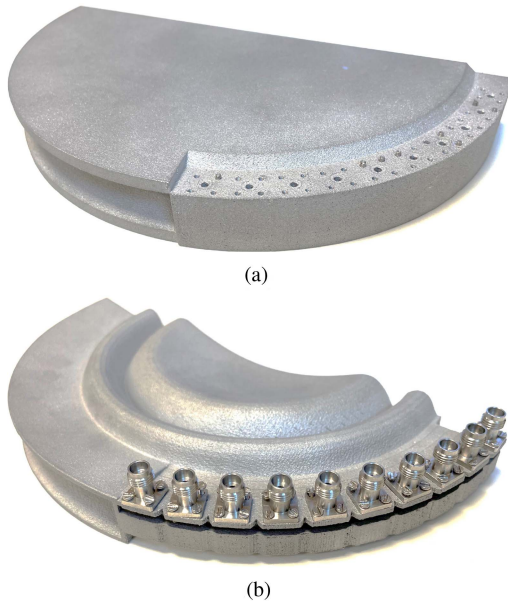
Prototypes manufactured additively in AlSi10Mg: (a) single-block design (shown without connectors) and (b) compact and lightweight design.
